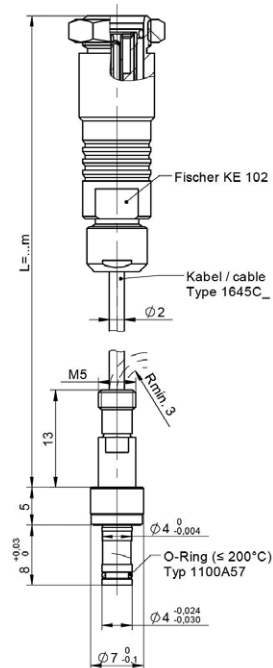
Pressure sensor Type 6177B with coaxial cable
